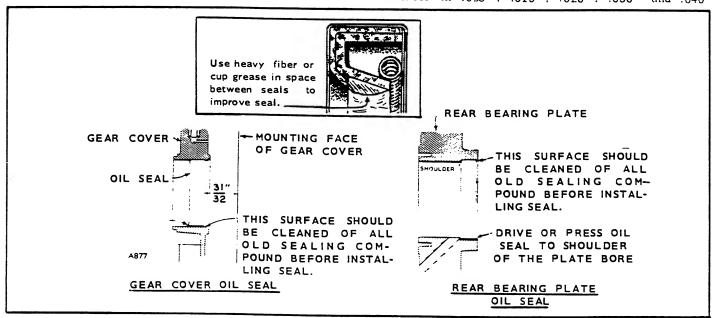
GEAR COVER AND REAR BEARING PLATE OIL SEALS
